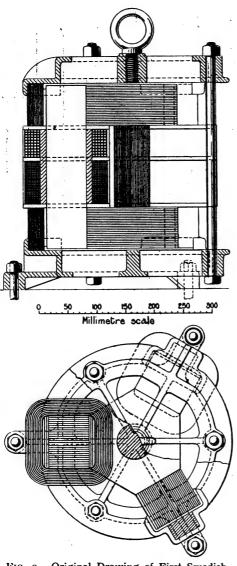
Original Drawing of First Swedish 3-phase Transformer.
